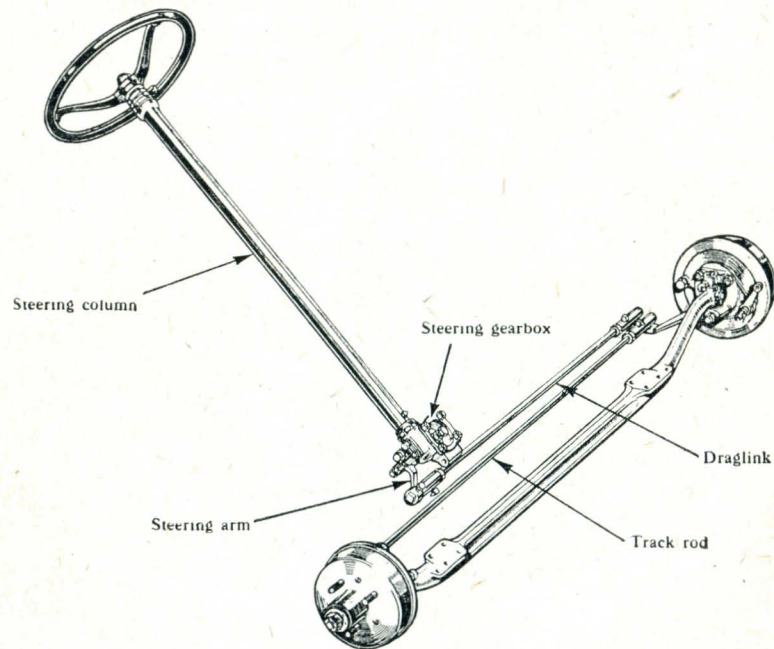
THE ARRANGEMENT OF THE STEERING MECHANISM OF THE THREE-SPEED MINOR
